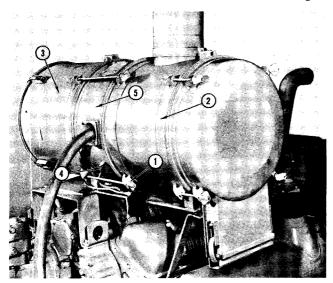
RECTIFIER MOUNTING, DRY AIR CLEANER
